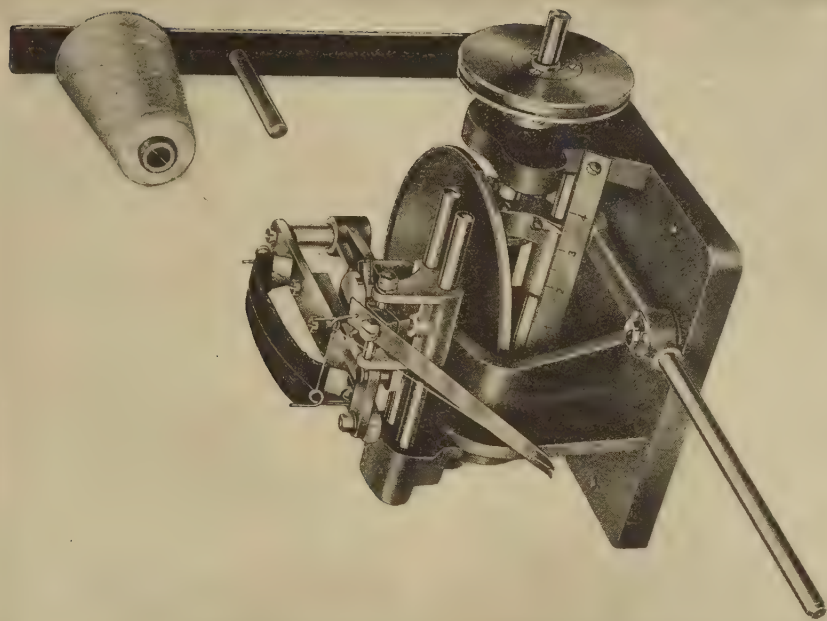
Cotton Interweave Attachment for Coil-winding Machine. (Automatic Coil Winder Co.)
